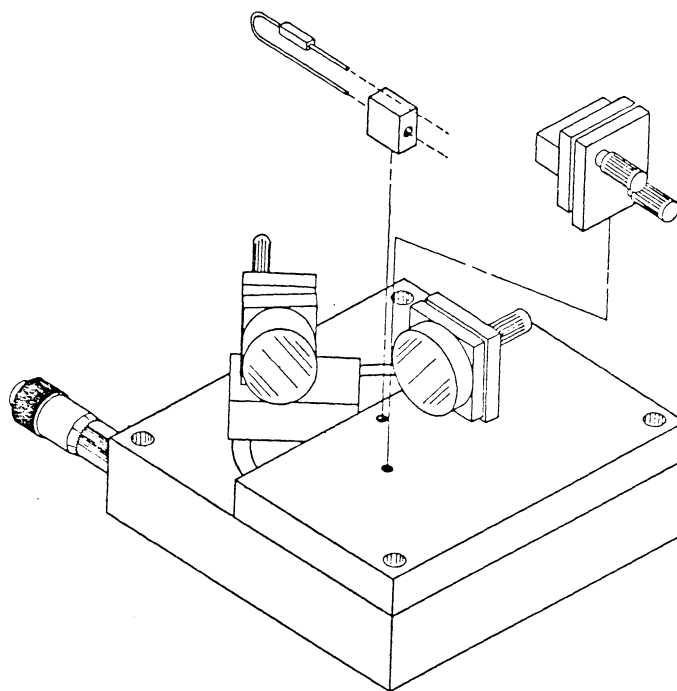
Exploded view of a single-mode, pulsed, tunable, dye laser [18].
